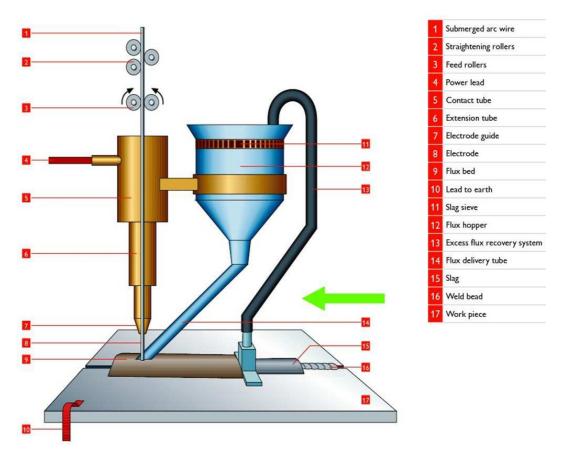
Submerged arc welding with one wire electrode (method 121)
